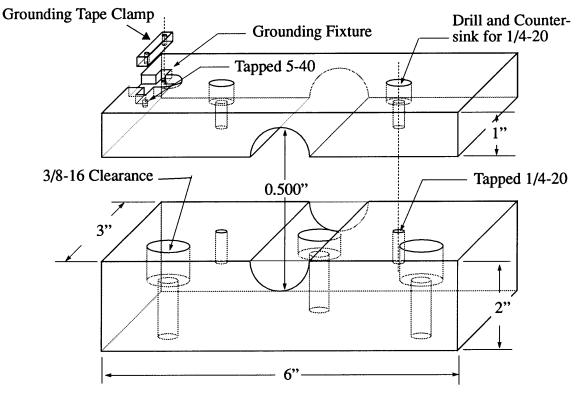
The Probe Clamp assembly. The 0.500" hole is bored to provide a slip fit with the probe.
